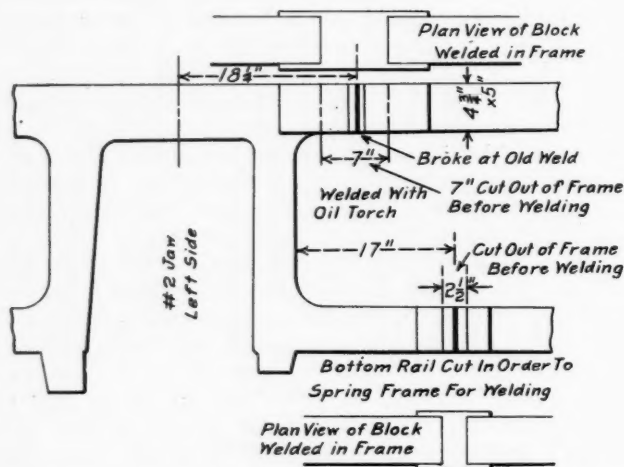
Location of Oil Weld on Frame of Passenger Locomotive
